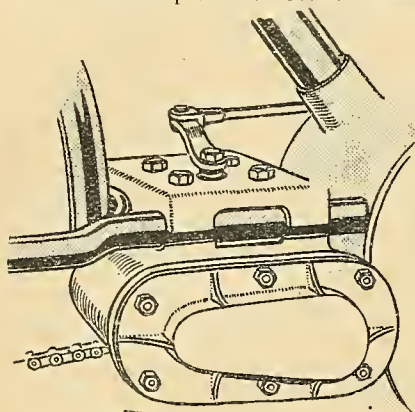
The new Bradbury countershaft two-speed gear box.
